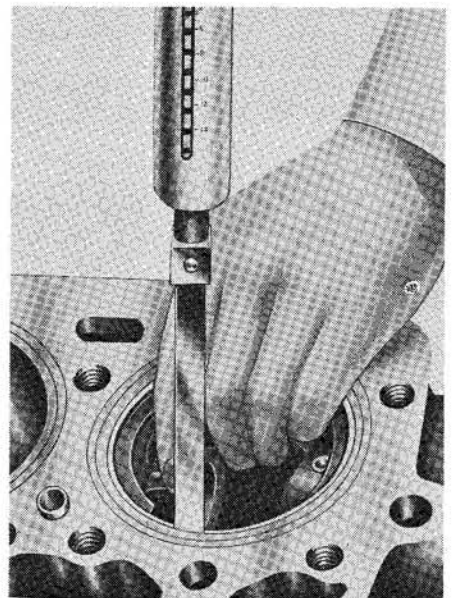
Checking piston to cylinder sleeve fit with feeler gage strip and pull scale; refer to text for specifications.
